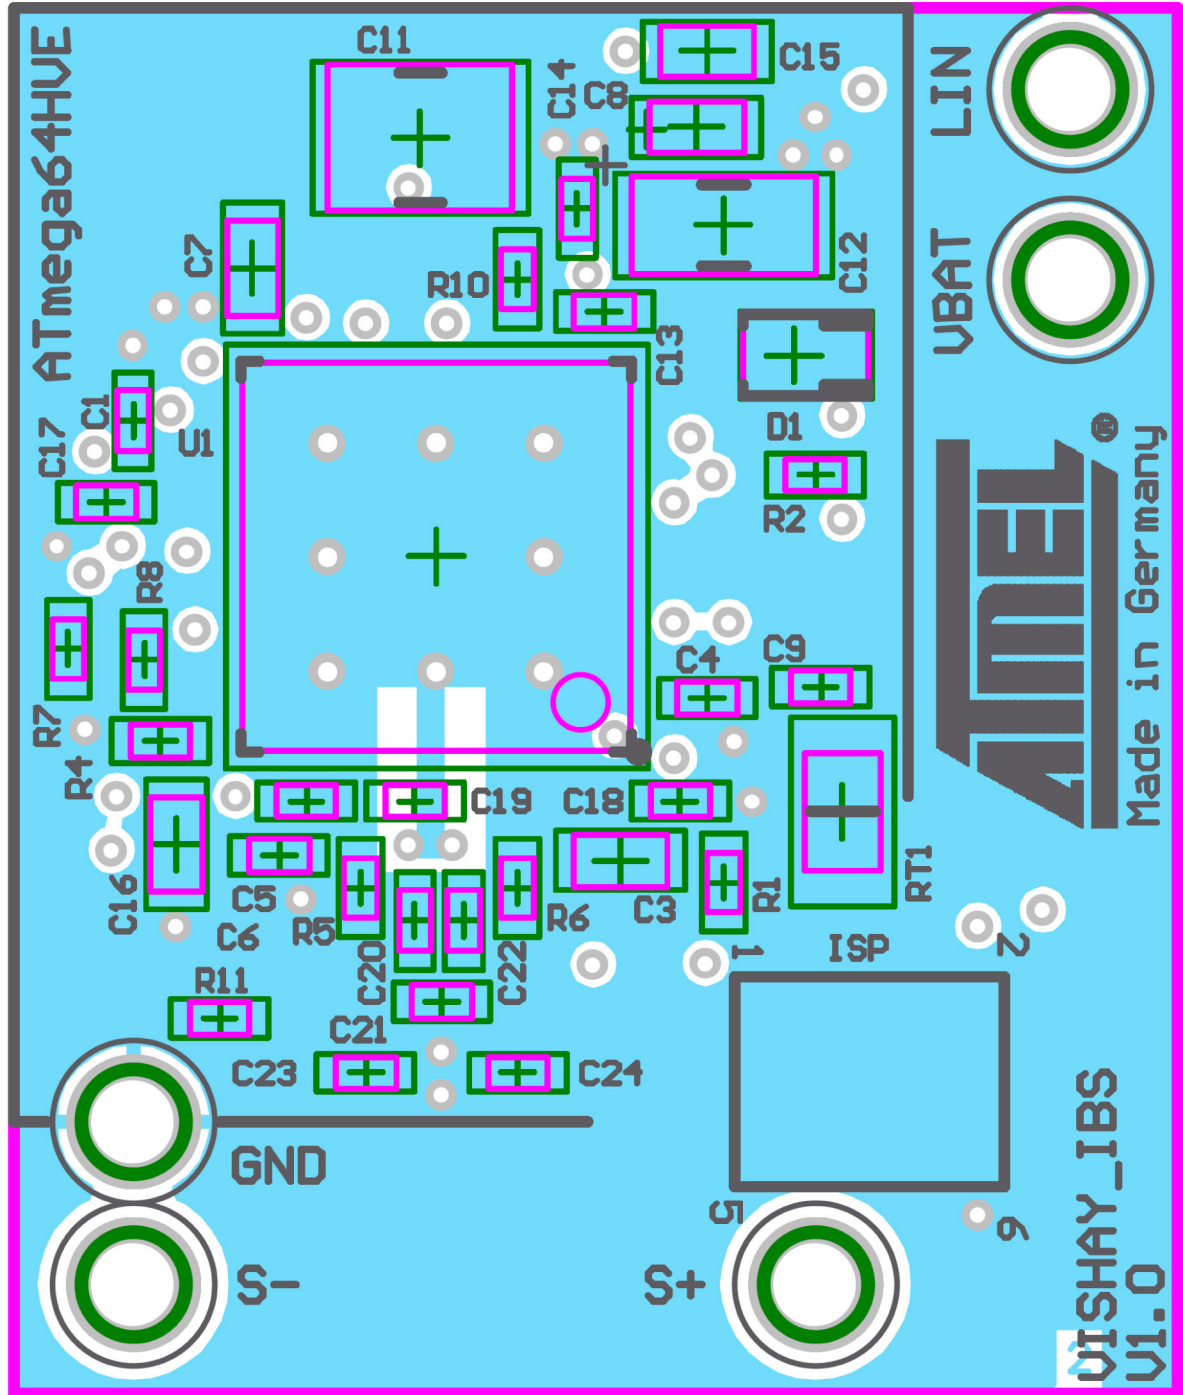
PCB Layout of IBS Module, Mid Layer 2 (View: Top Layer)
